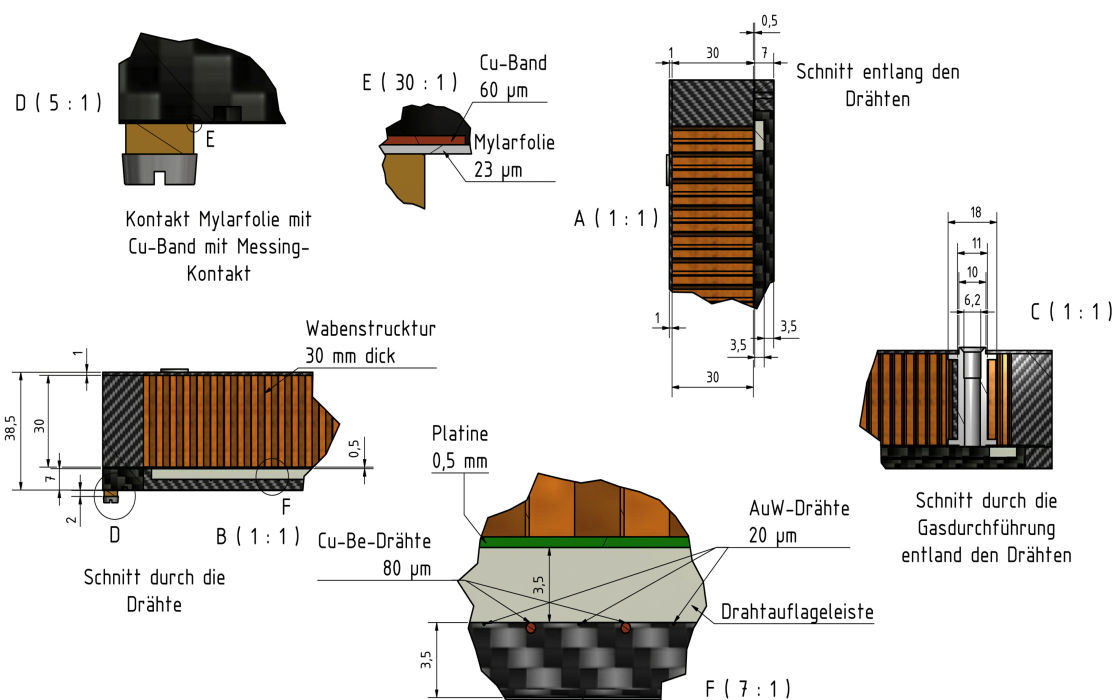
Cuts through the TRD prototype with carbon. The shown are contact of Mylar foil with Cu-band brass contact, honeycomb structure, cut alongwires and gas feed through.
